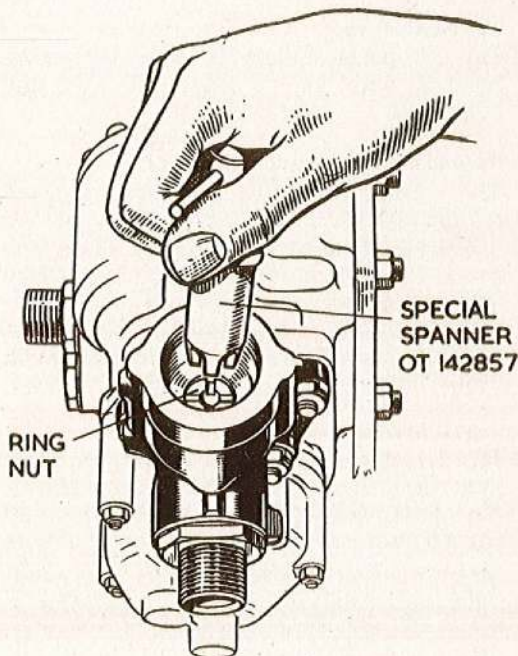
Use of special spanner O.T. 142857 for unscrewing slotted ring nut in reducing valve body
